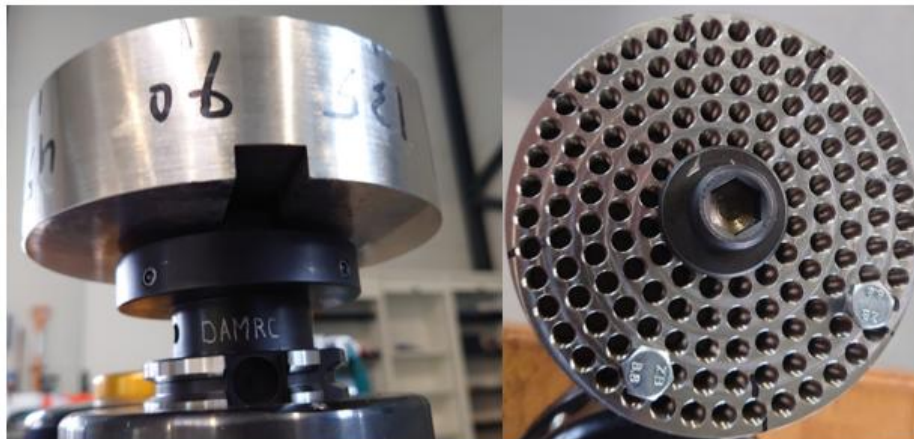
The test piece in Figure 27 as modified for testing in the DMU.
